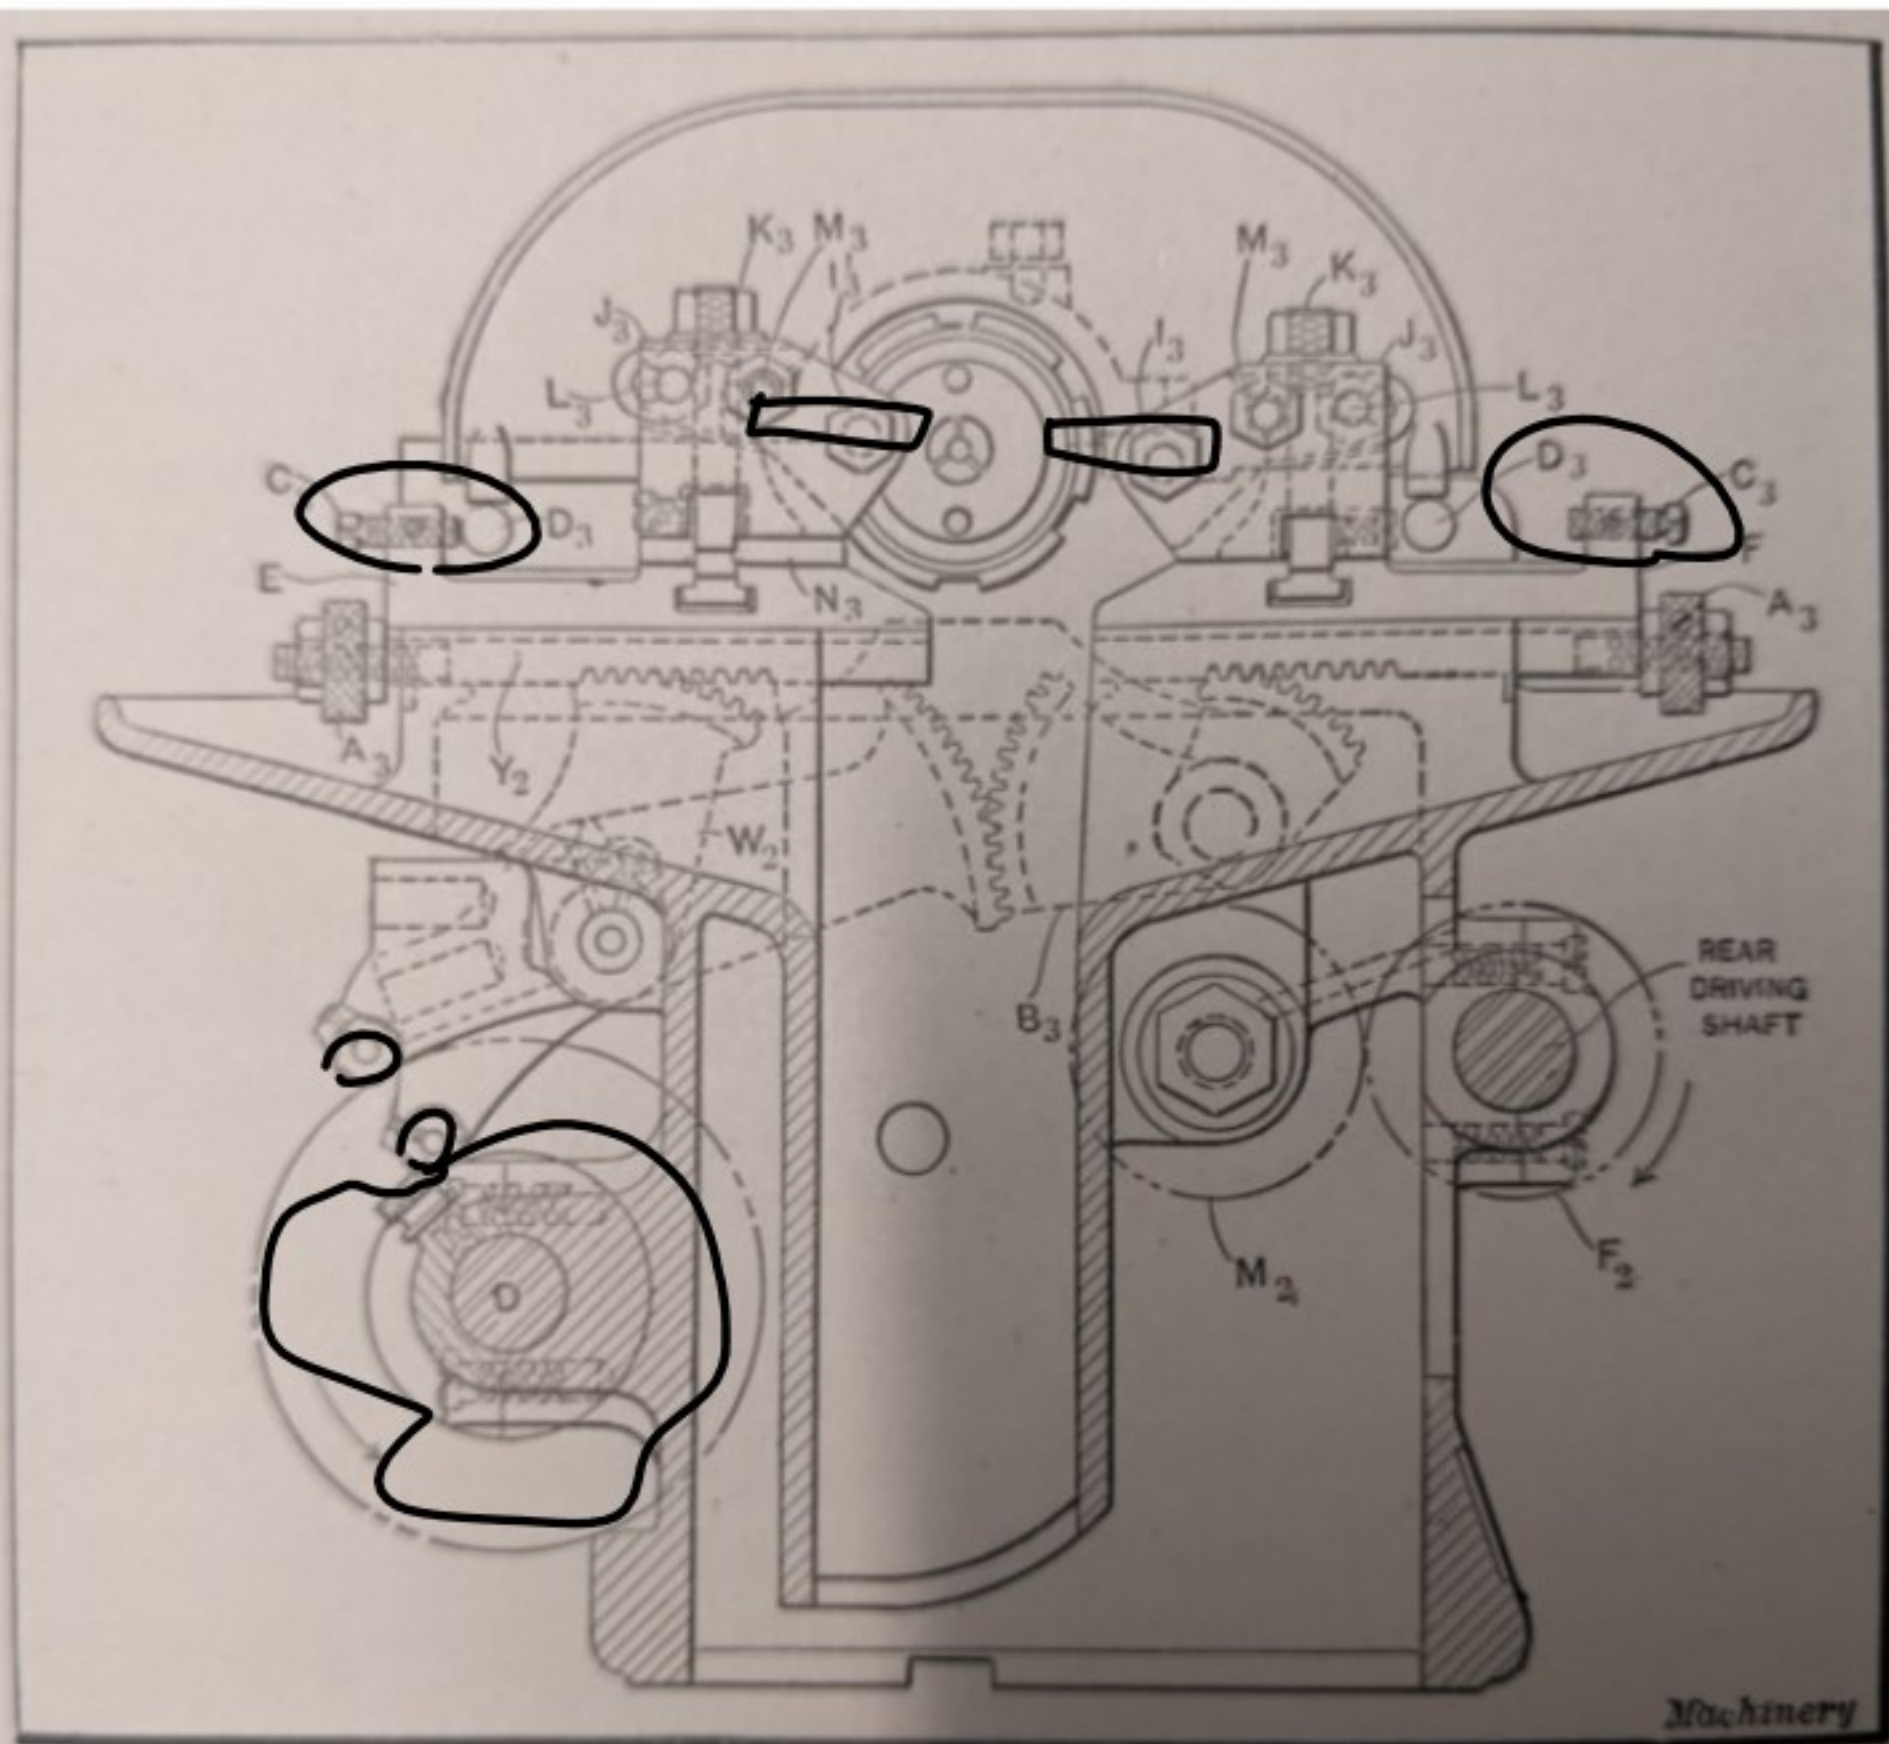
Partial Section of No. 60 Machine showing Mechanism for Operating Cross-slides
